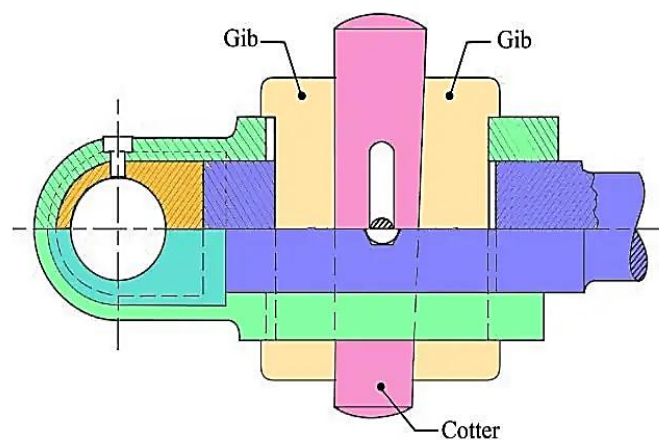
Gib And Cotter Joint for Strap End of a Connecting Rod
